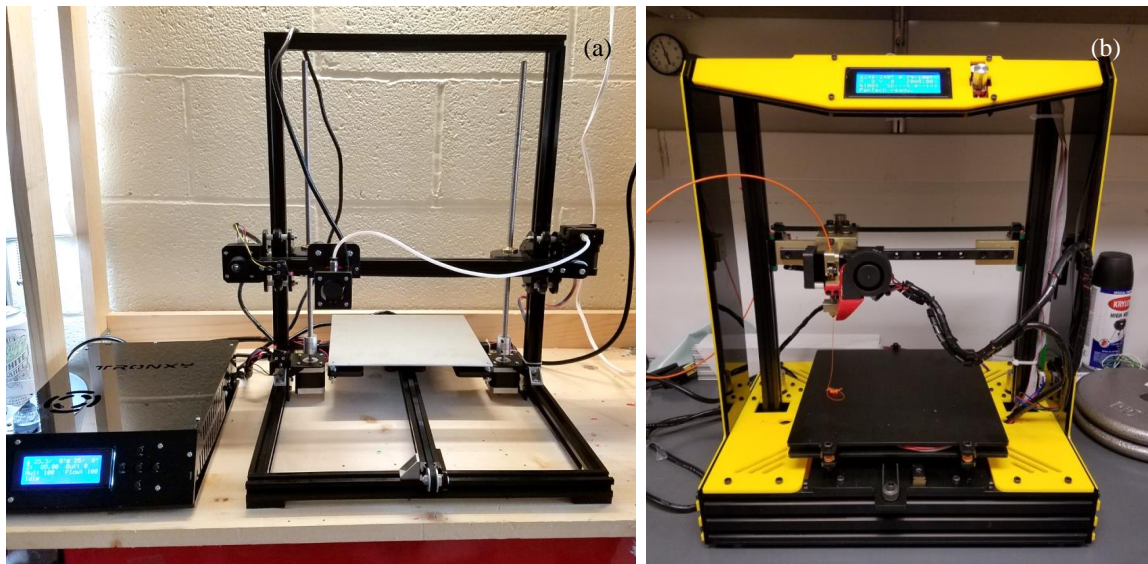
(a) Prusa i3 and (b) Prusa i4 FDM machines used in this chapter.
